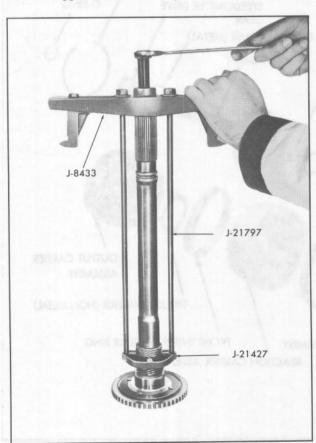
Removing Nylon Speedometer Drive Gear
